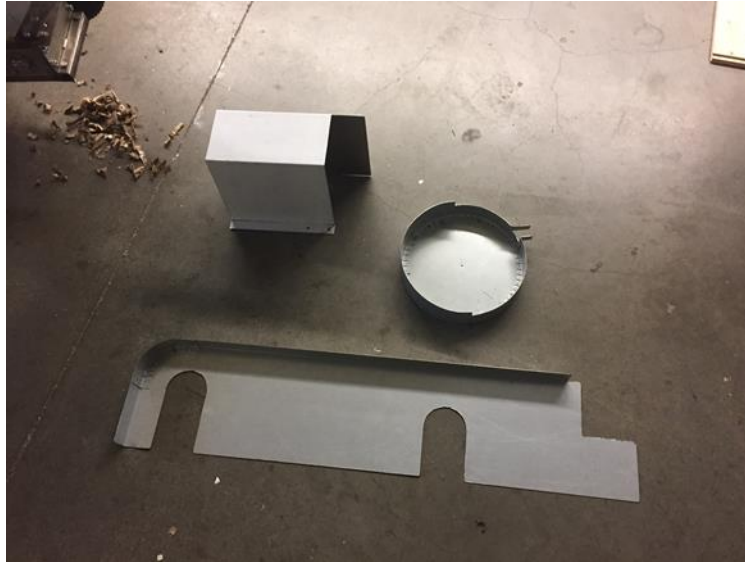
Sheet metal covers for chains, flywheel, and large sprocket
